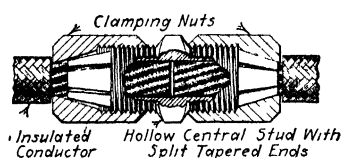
A "solderless" connector for wire or cable (Frankel Connector Co)
